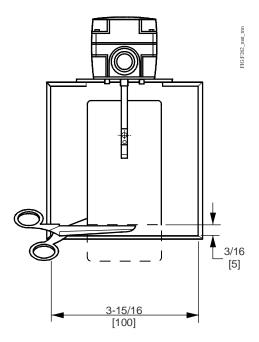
Trimming the Paddle, Dimensions, in. [mm]
